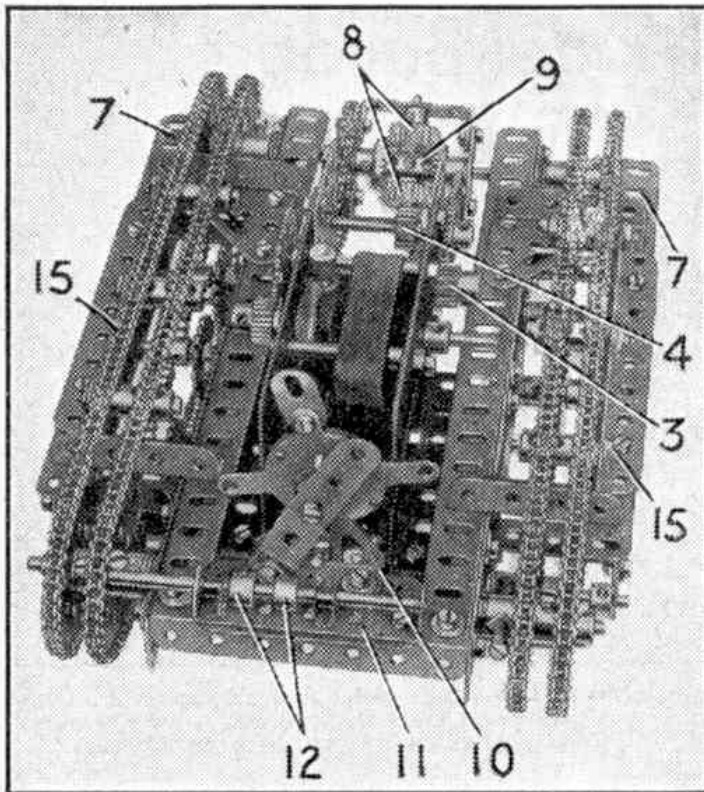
A front end view of the tank chassis showing the Motor switch and the control for the tracks.
